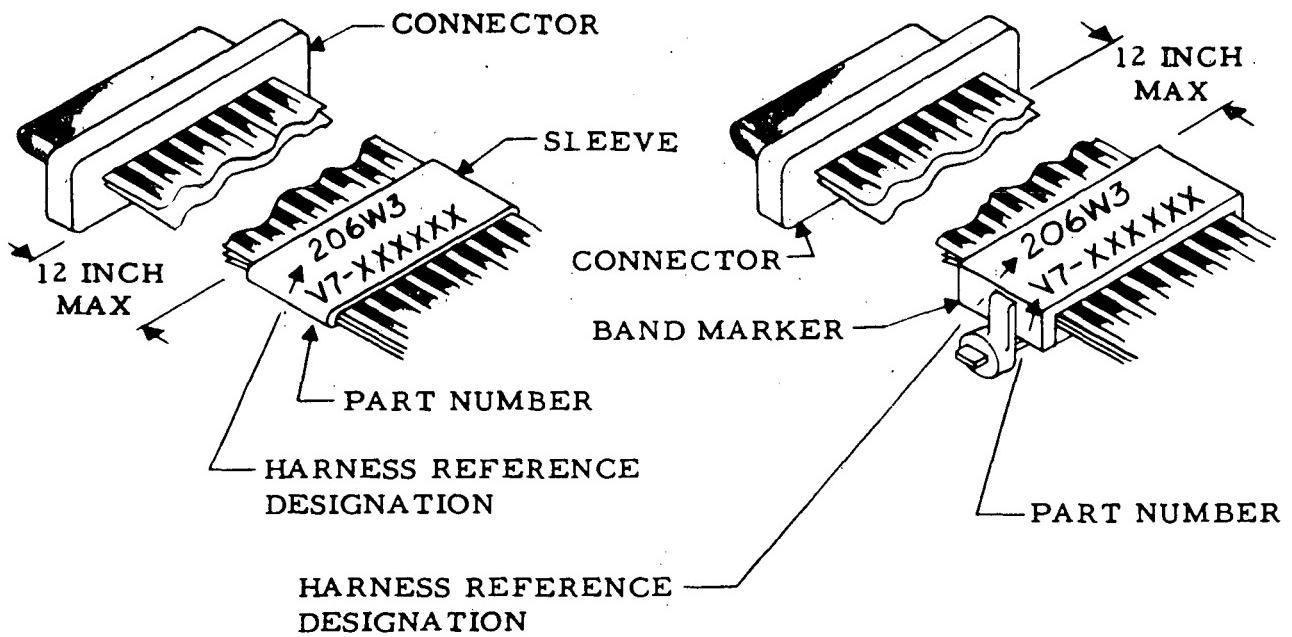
IDENTIFICATION OF HARNESS ASSEMBLY
